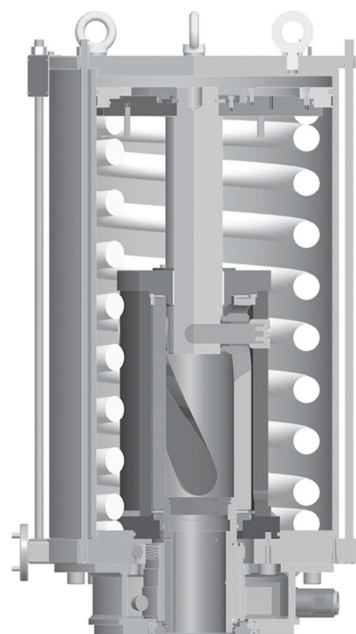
A helical-slot actuator combines the spring and pneumatic cylinder into a single vertical housing mounted directly above the valve. As the piston moves, rollers engage slots on the side of the helical cylinder to turn the valve.
